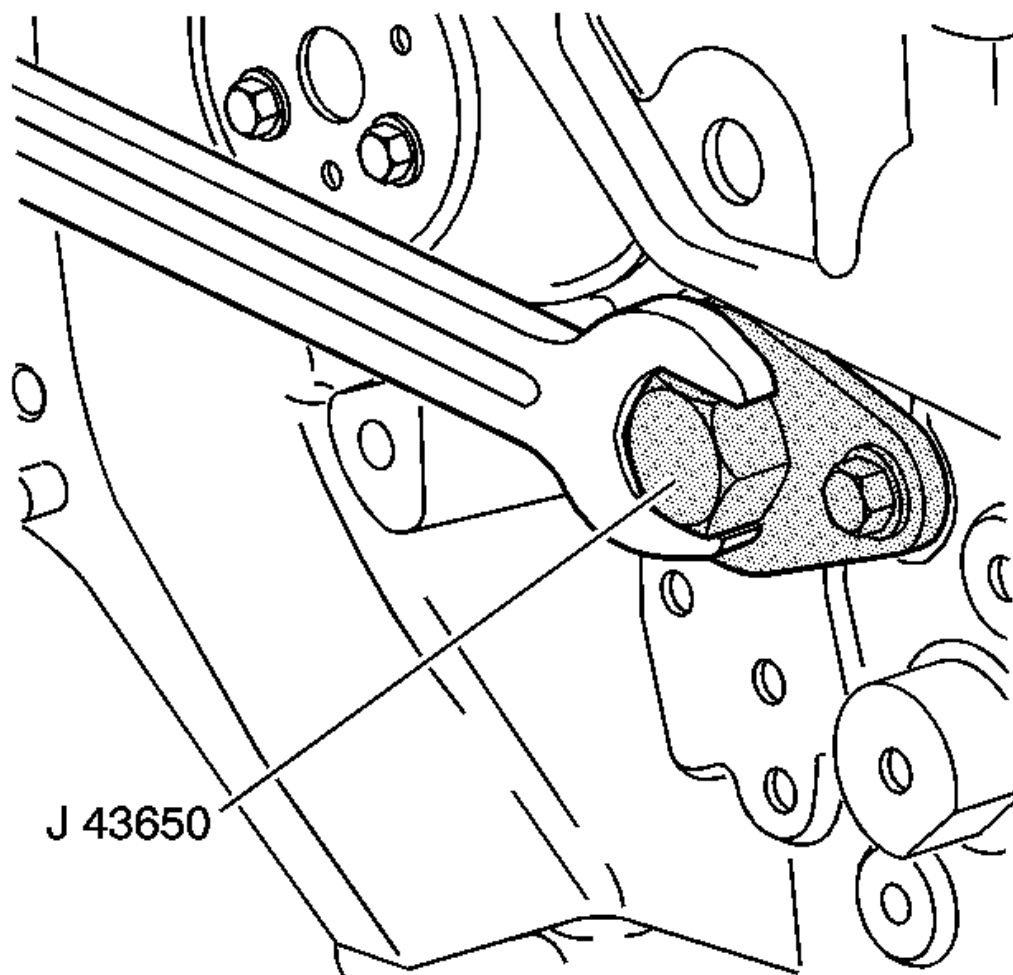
Seating Balance Shaft Bushing Into Bore Using Special Tool J 43650
